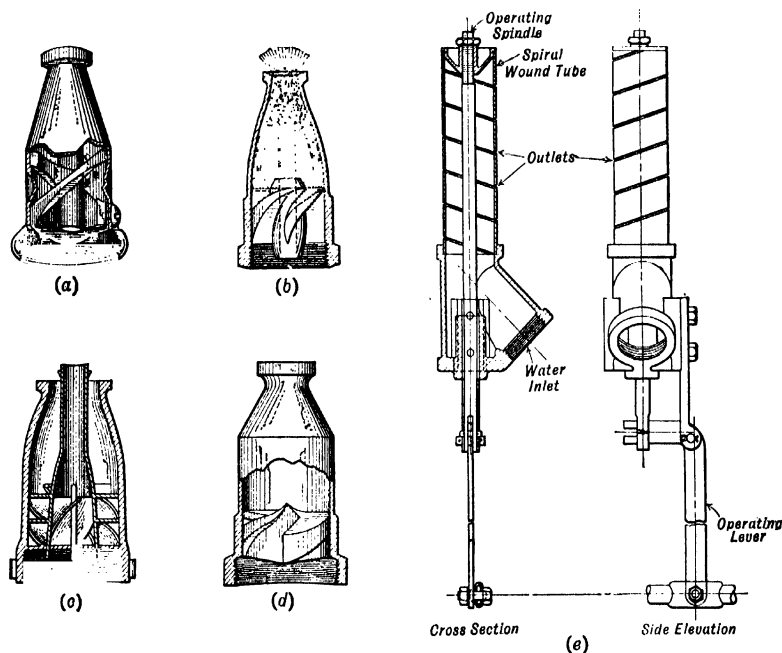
Rigid Head and Adjustable Head Spray Nozzles.
